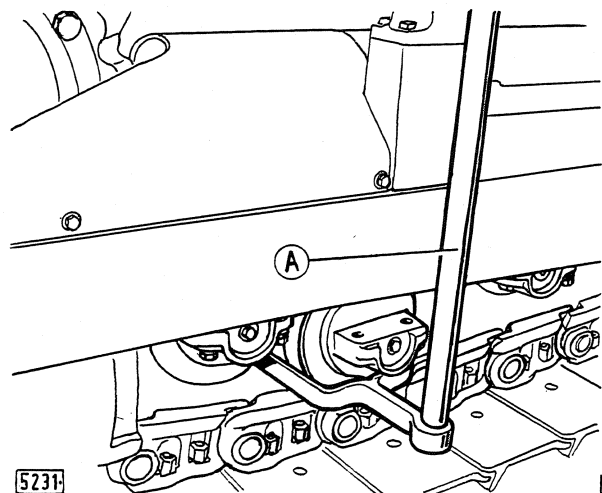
Removal (installation) of a roller from track frame using tool 75295729 (A).
